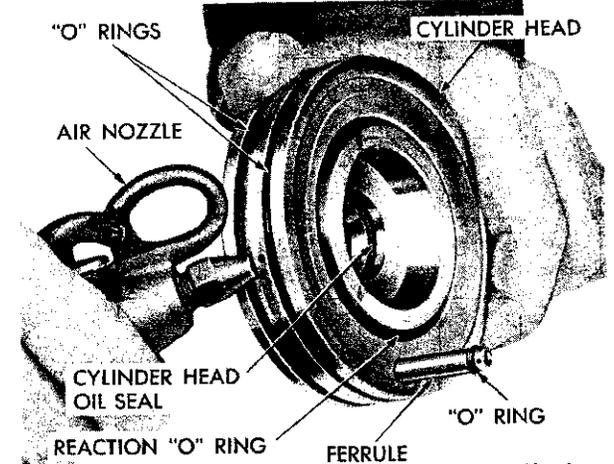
Removing the Reaction Ring Seal From The Cylinder Head
